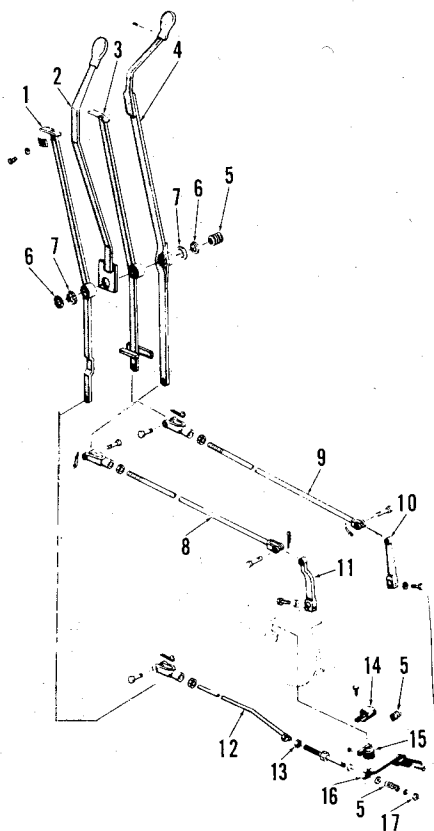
Exploded view of 8600-9600 transmission shift linkage and parking brake linkage. Bushings in levers (1, 3 and 4) are not serviced separately. Control lever (2) must engage either parking brake lever (1) or high-low range lever (3). Parking pawl override spring on end of rod (12) was inside transmission on 8000-9000 models. Items (15 and 16) replace item (1—Fig. 157), on 8000-9000 models. (Item 16 is shown reversed.) Item (15) was not used on some early models.
